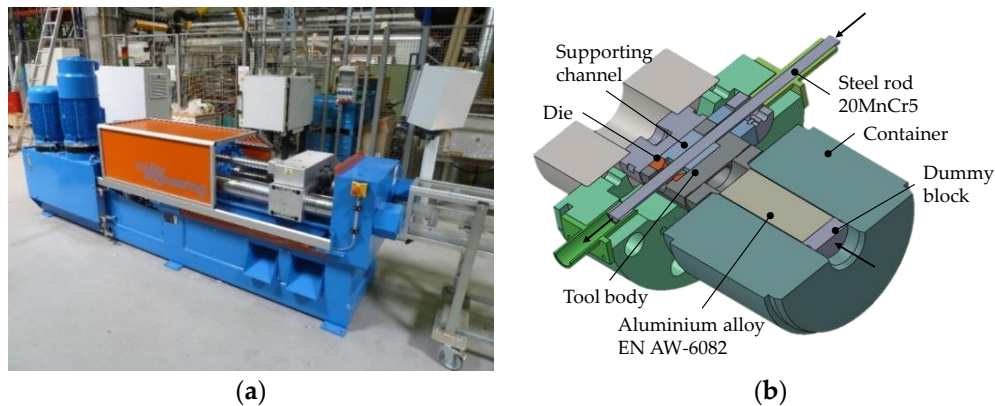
(a) 2.5 MN extrusion press (Müller engineering GmbH, Todtenweis, Germany); (b) Longitudinal section of LACE tool and container.
